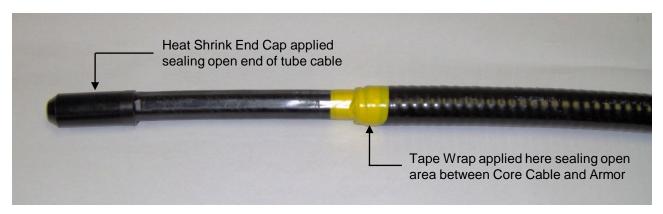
Polyethylene Outer Jacket and Armor Removed and Core Cable Exposed
